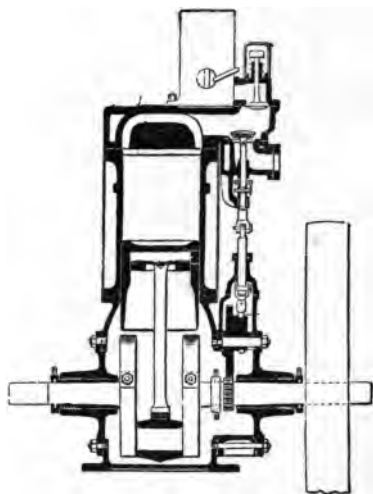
Roots' Single Cylinder Carriage Oil Motor (Latest Type).
